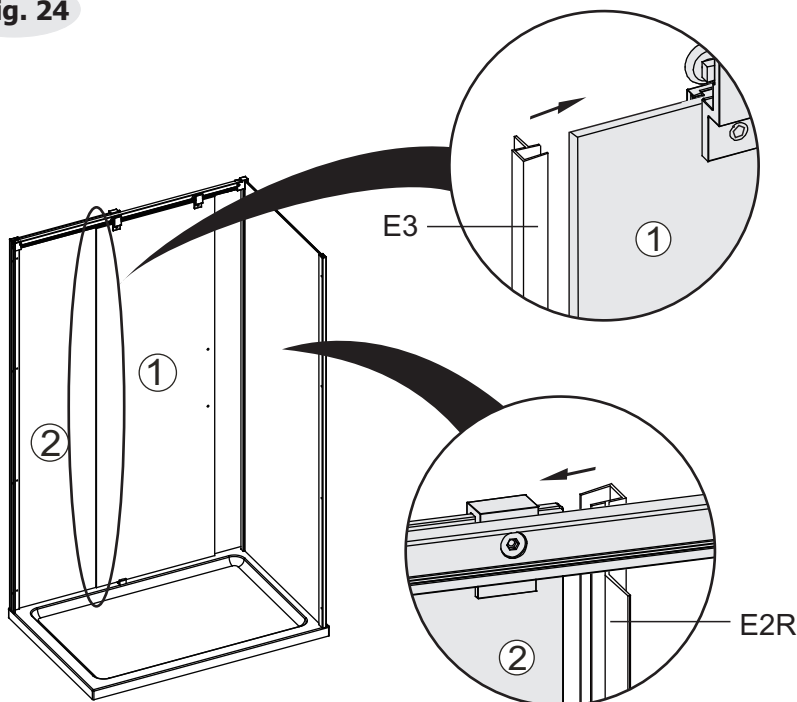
Install the fixed panel seal (E2R) on the fixed panel. Install the door panel seal (E3) on the door panel.
